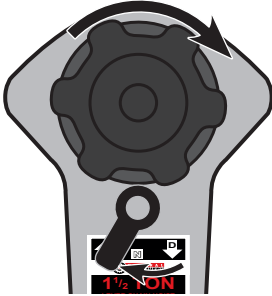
/96482 Selector Lever and Brake Knob “U” / Up Position
